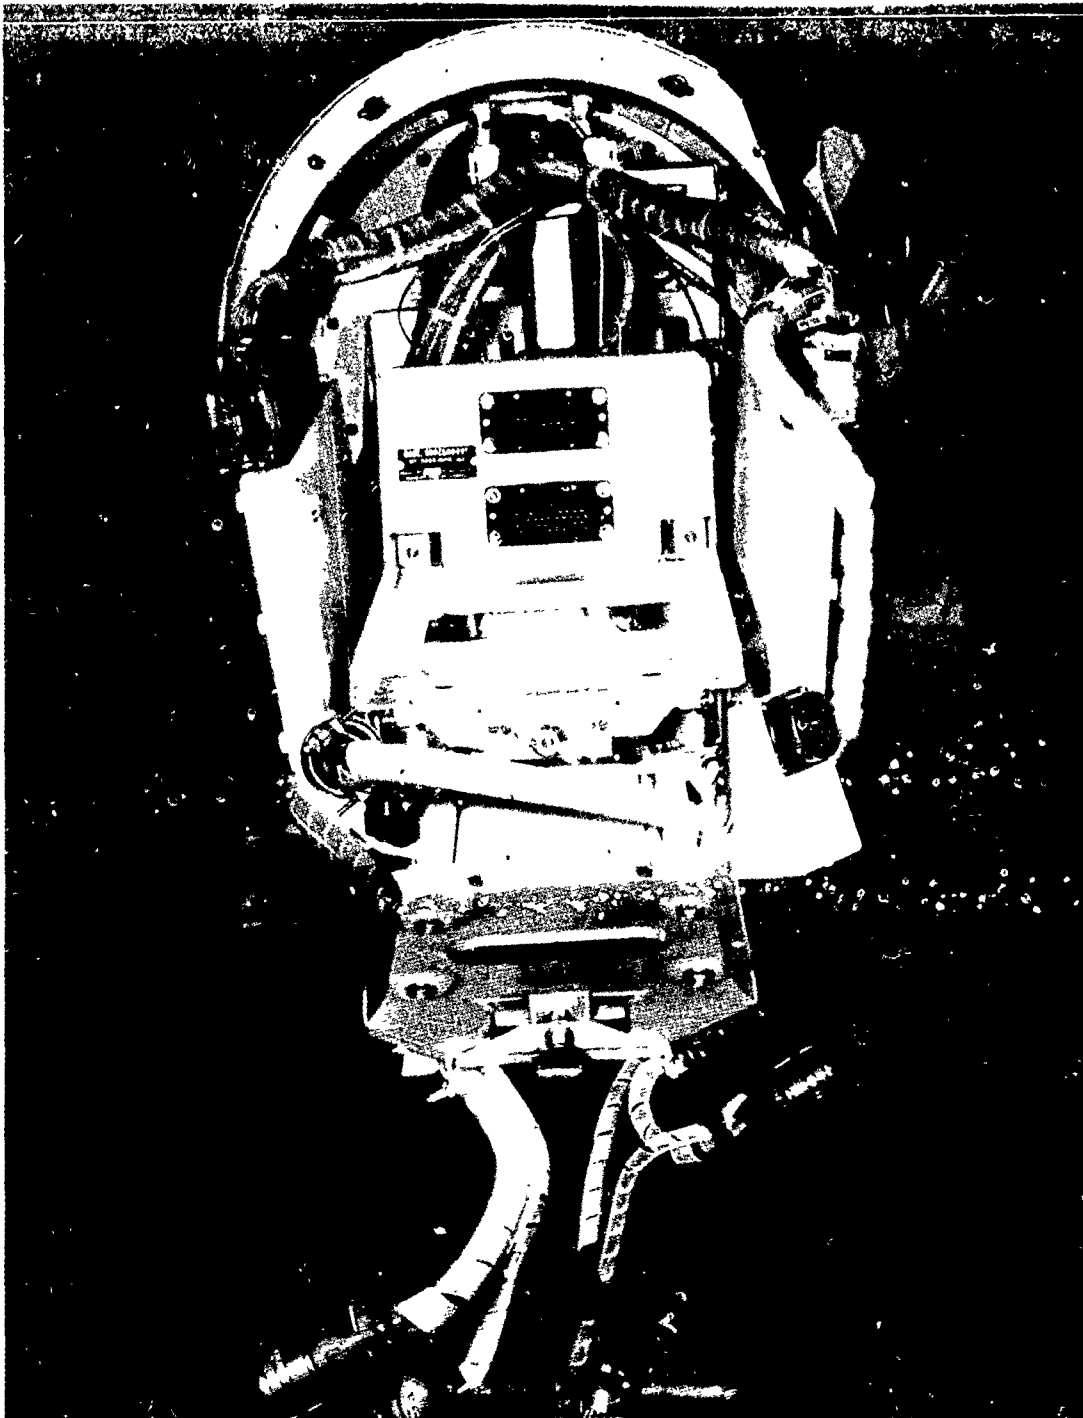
Pod 2 Aft Beam and Aft End of Center Section Wiring (View Aft Center).
